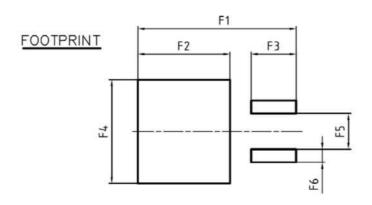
Outlines TO-220 FullPAK, dimensions in mm/inches
